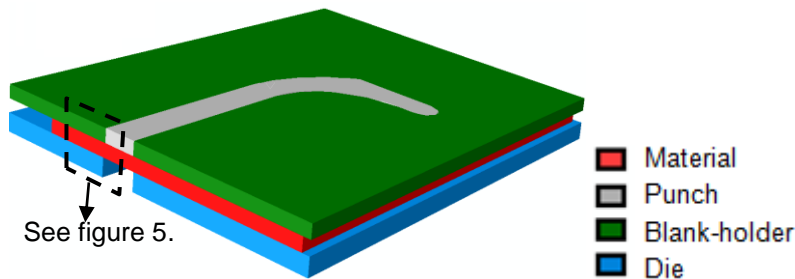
The assembly model of half *Edge-Fracture-Tensile-Test* for the blanking stage.
